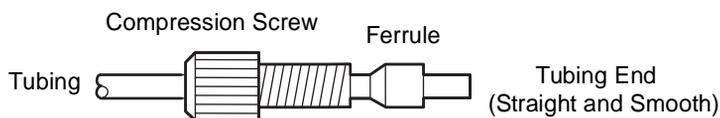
Reverse Ferrule and Compression Screw Assembly
